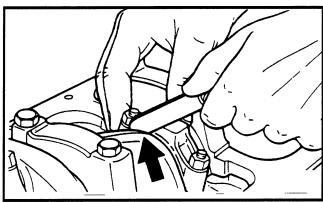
MEASURE THE SIDE CLEARANCE, CONNECTING RODS
